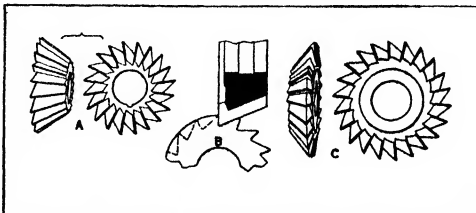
ANGULAR MILLS. (A) SINGLE SLOPE CUTTER. (B) CUTTER WITH SINGLE SLOPE PRODUCING TEETH IN ANOTHER CUTTER. (C) DOUBLE SLOPE MILL WITH UNEQUAL ANGLES
